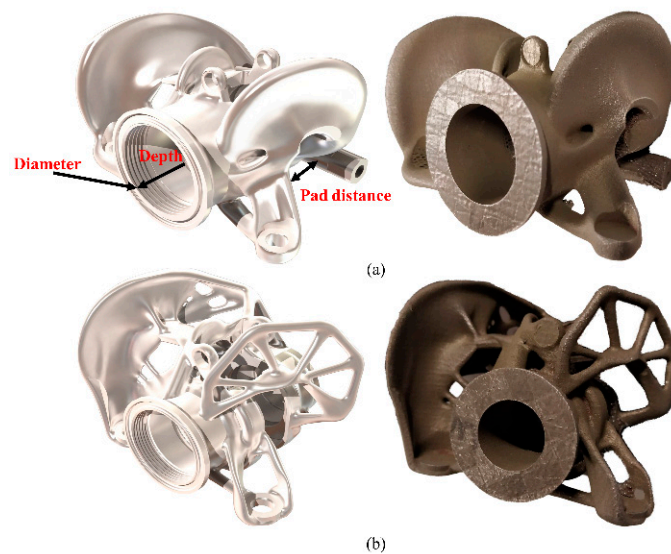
A geometry comparison between the CAD models and the 3D printed parts of the housings: (a) The front housing and (b) The rear housing.
